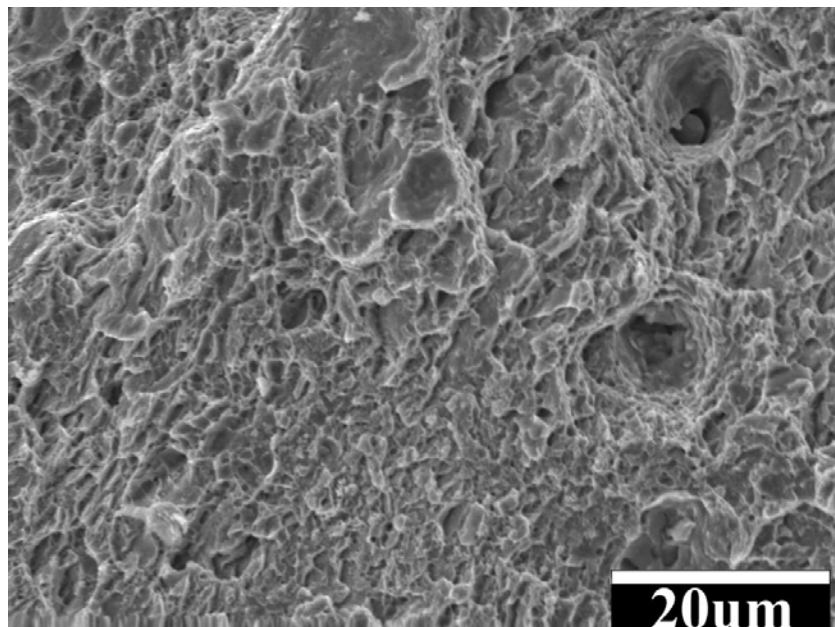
Microscopic View of the Final Fracture Region on a Straight Cylinder Specimen Fracture Surface, $S_a = 588$ MPa (Specimen G5)
